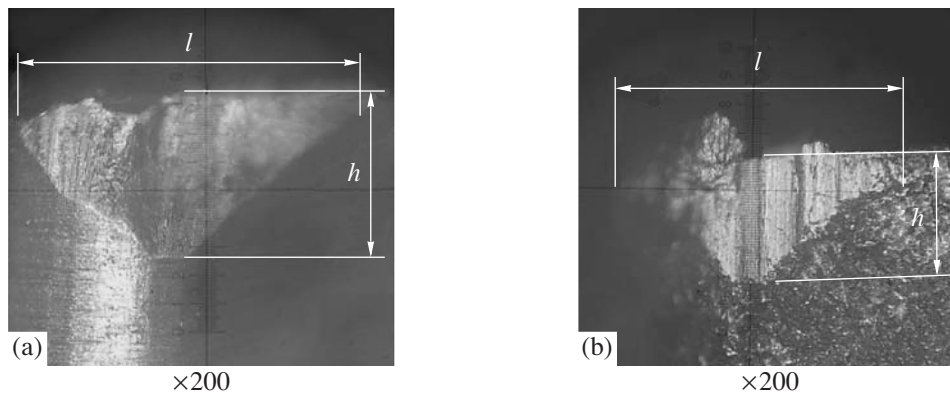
Wear at the top of the VK6 cutting tool over the rear facet h and front cutting edge l for the cutting way $L = 42$ km ($i = 52$): (a) CT without coating and (b) CT with the TsLAB-2/VK6 coating.
